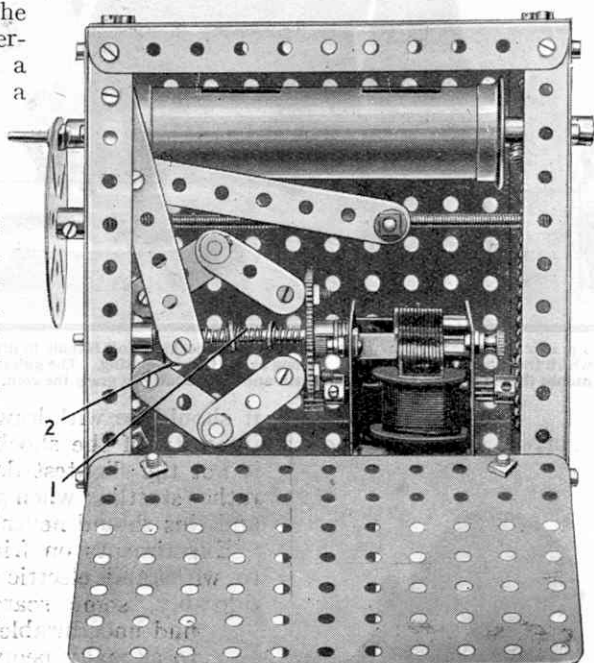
General view of the Meccano Rotoscope showing the governing mechanism.
